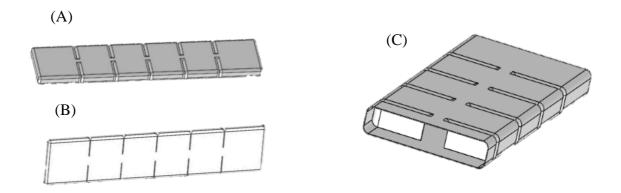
(A) Top View; (B) Bottom View; (C) Cross-Section of Actuator Design
